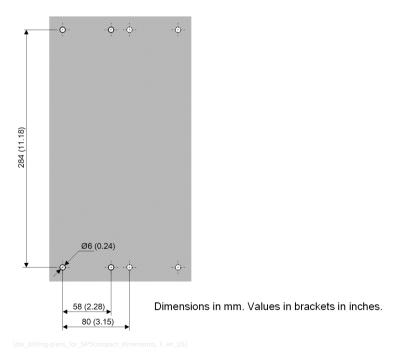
Drilling Pattern of a Surface-Mounted Device with Integrated On-Site Operation Panel
